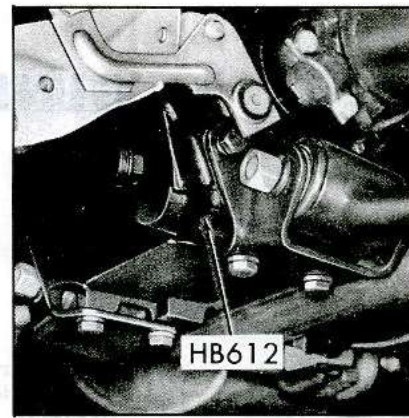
Differential Number Stamped Lower Left Side of Casting
